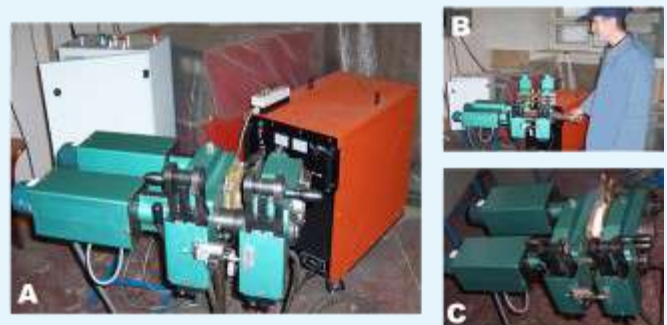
Basic Installation of MIAB Model MD-1 (A), Installation of pipes in the clamping devices of the welding machine (B) and Process of welding pipes Ø51x4mm (C)
